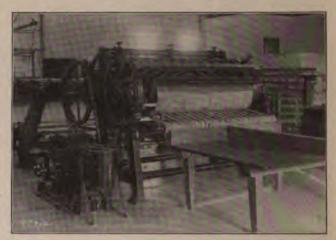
HAMBLET CUTTER. DIRECT CURRENT MOTOR
